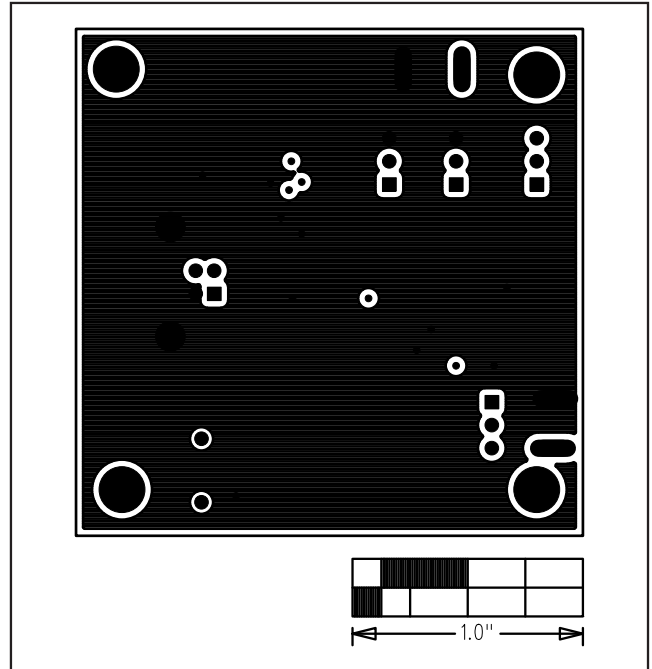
MAX14508E EV Kit PCB Layout—Solder Side
